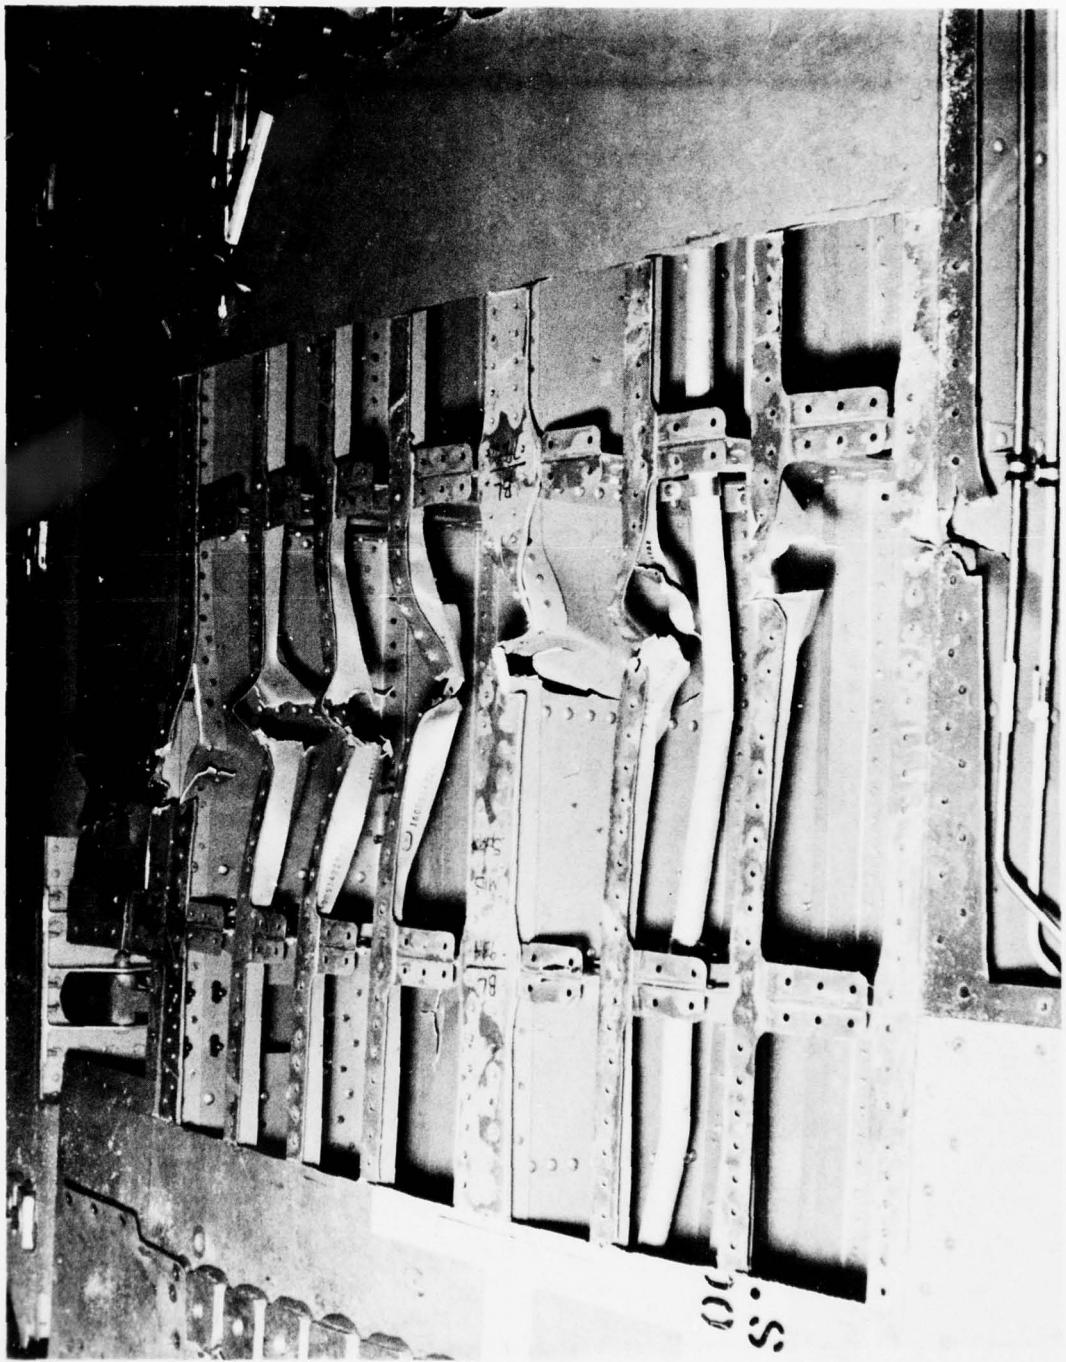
Right-Hand Horizontal Tail Spar and Stringer Damage After
